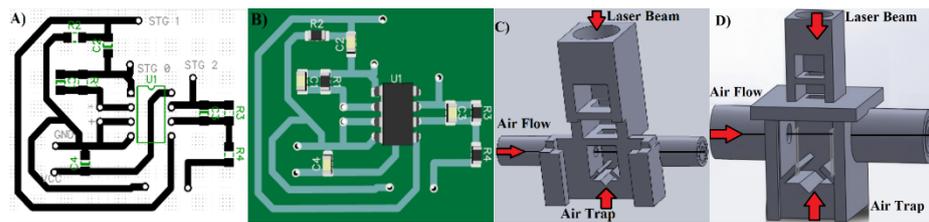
PCB and optical stage chamber designs. (A) PCB traces of optical stage and amplification, (B) 3D PCB design, (C) 3 × 3 mm PM flow chamber and (D) 9 × 9 mm PM flow chamber.
